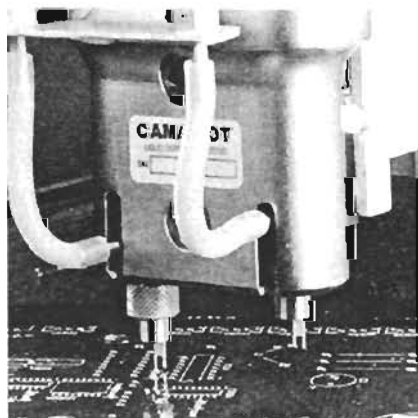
This dual-nozzle rotary displacement pump dispenses solder paste and/or adhesive with two different sized nozzles, in the same dispensing cycle (Speedline CAM/ALOT)
